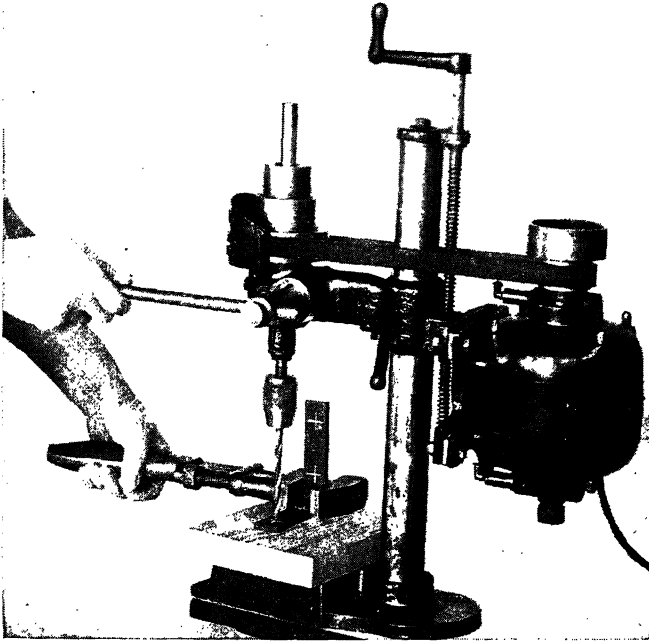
Drilling with an electric bench drill. Do not hold stock in the hands while drilling
